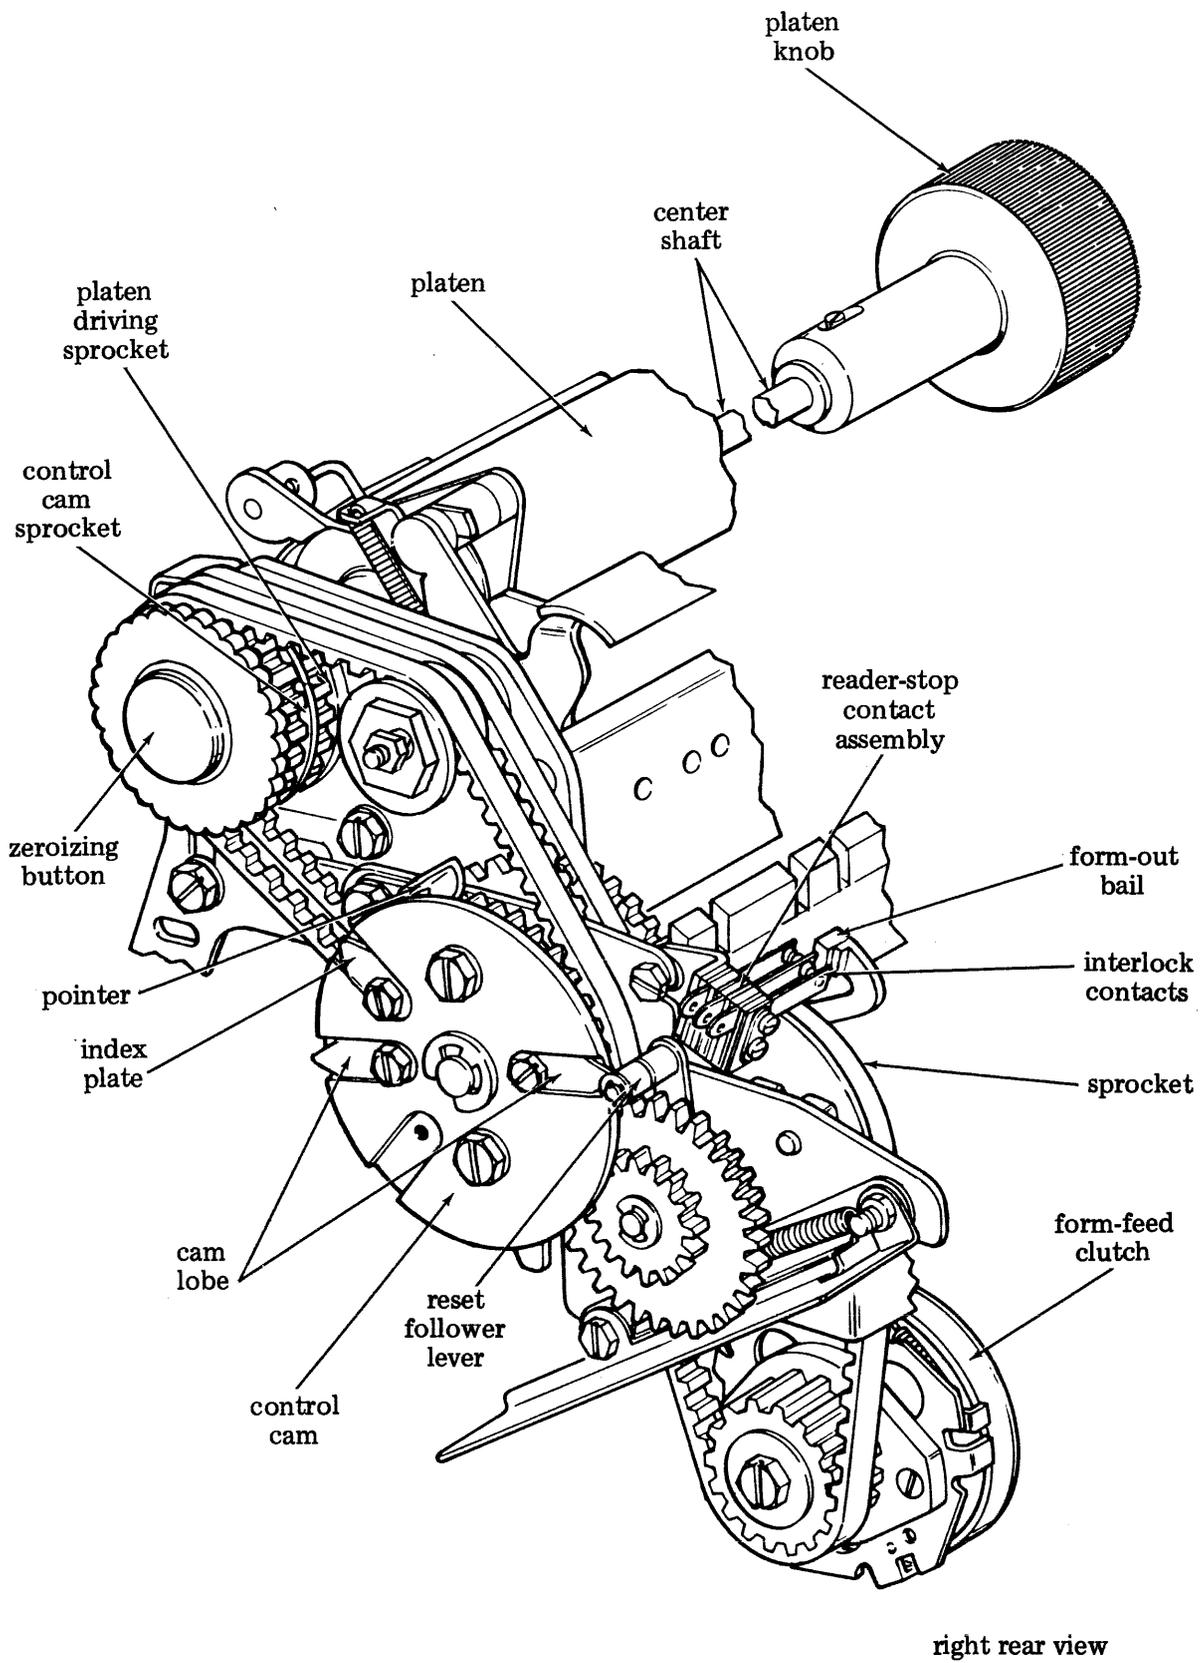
Platen Drive Mechanism (Sprocket Feed)
